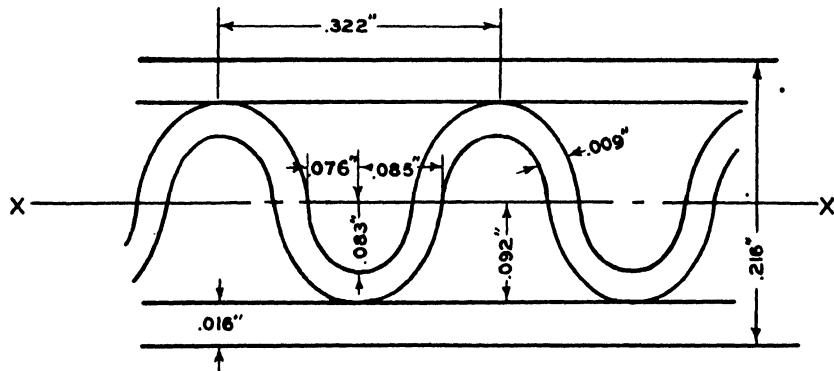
Dimensions of Cross-Section of Corrugated Board.
